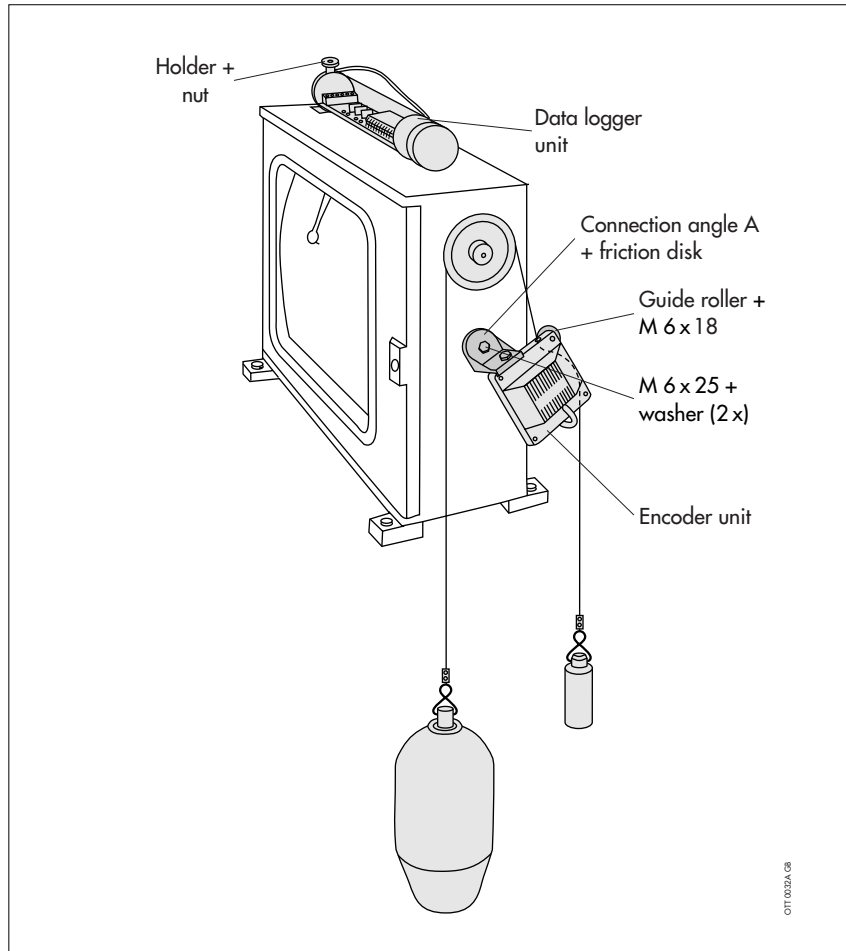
Example of attachment to Vertical Drum Recorder from another manufacturer
